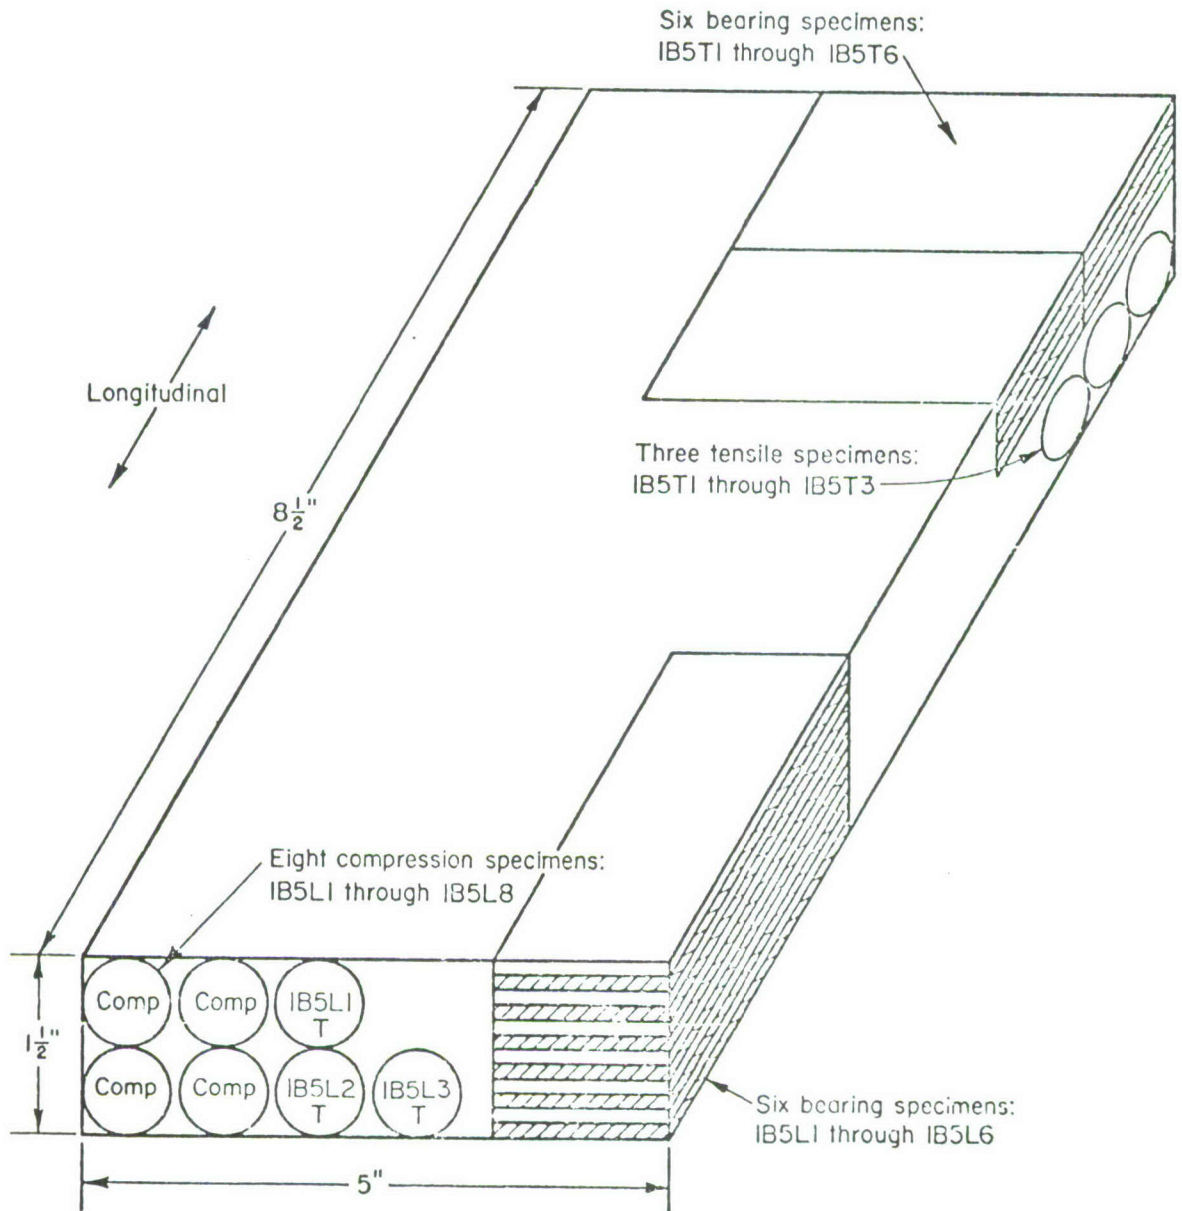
LOCATION OF TEST SPECIMENS FOR
